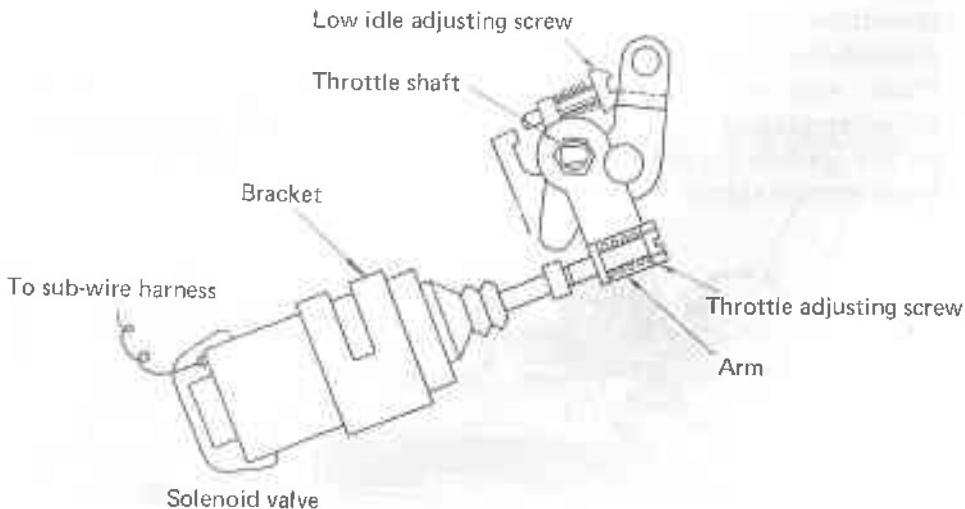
Pump Lever &amp; Link Assembly B0957
